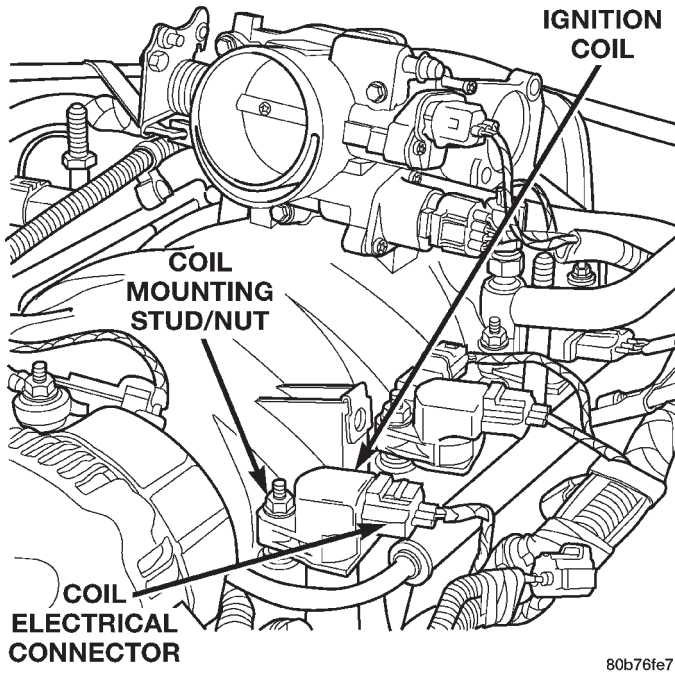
Ignition Coil Location—4.7L V-8 Engine
